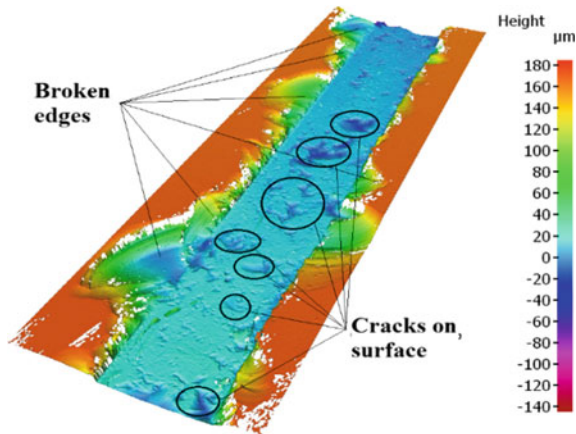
Image from 3D optical profile meter of machined slot with 1 mm diameter tool and 9 μm feed per tooth
